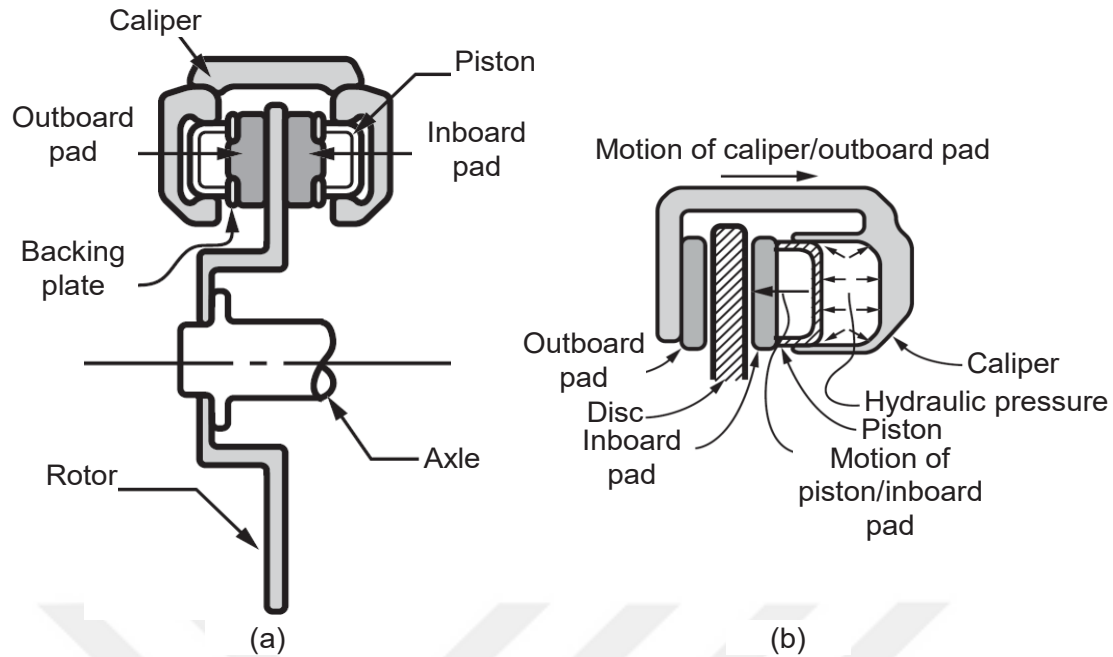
Two main caliper design are shown schematically a) Fixed caliper b) sliding caliper. This figure is adapted from [Kin03].
